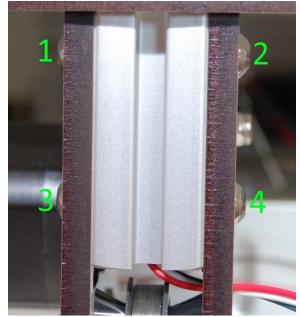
Lower tightening order. (Old style wire shown.)
